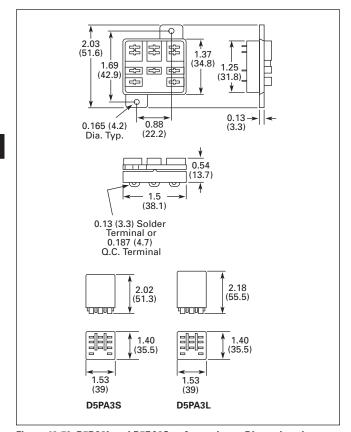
D5PA3L and D5PA3S— Approximate Dimensions in Inches (mm)
